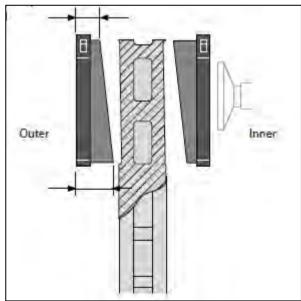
BRAKE PAD WITH EXAGGERATED TAPER WEAR
